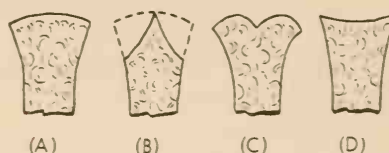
Suggested end designs for band iron. (A) Fan shaped; (B) Arrow head; (C) Fish tail; (D) Flared.
